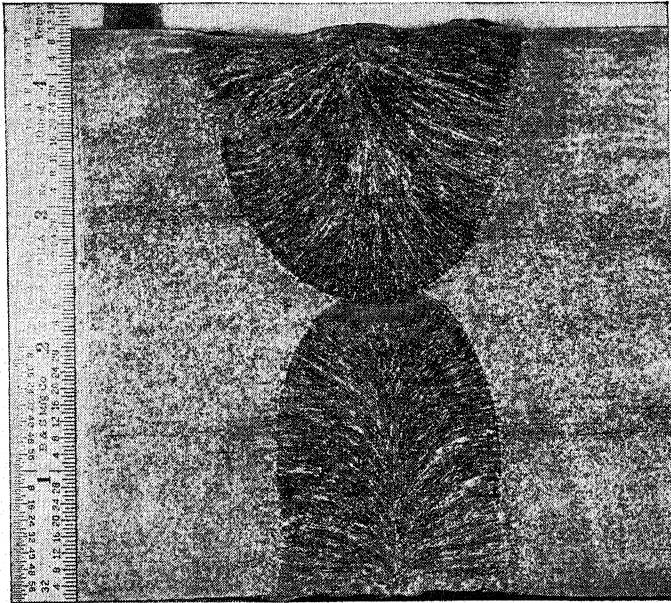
Photomicrograph of butt weld in $4\frac{1}{4}$ inch underframe plate, welded by automatic arc welding.
